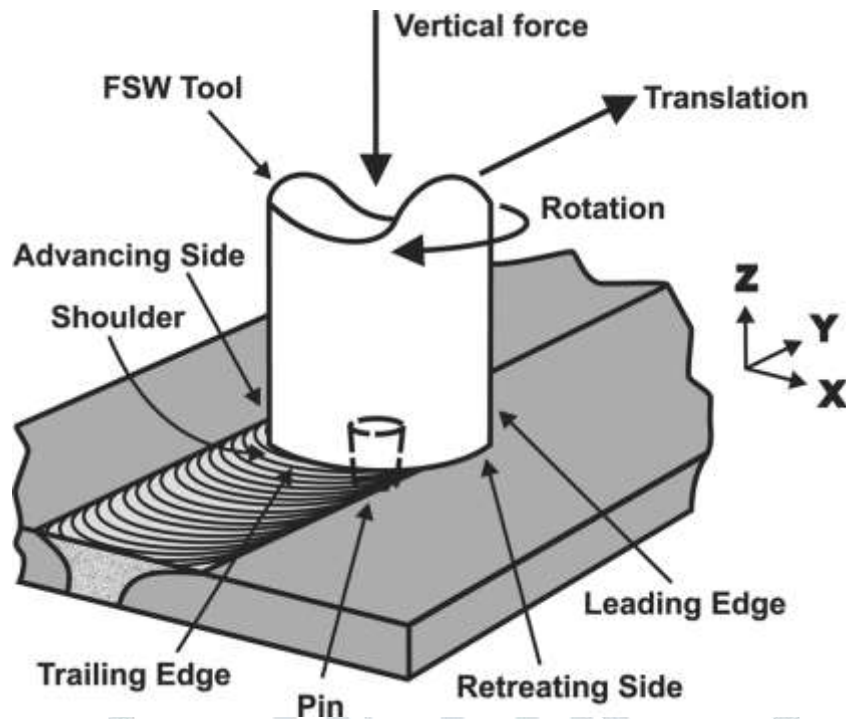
friction stir welding process(Mubiaya and Akinlabi,2003).
